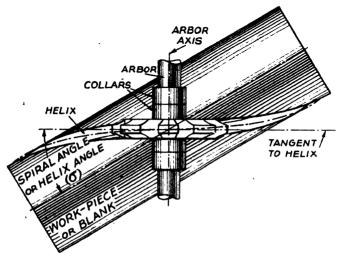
MILLING A HELICAL GROOVE IN A CYLINDER
